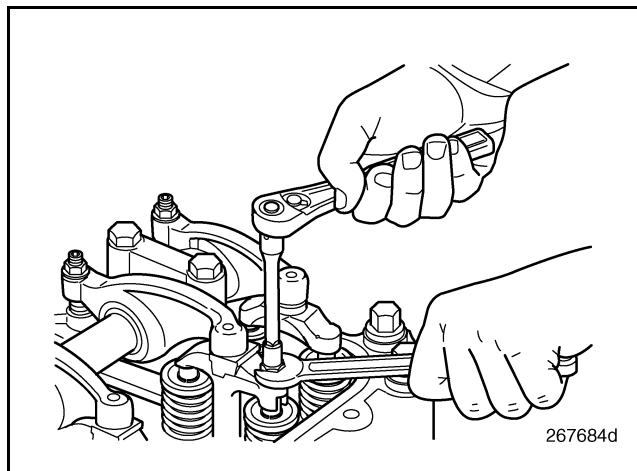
Loosening Valve Yoke Adjusting Screw Locknut
